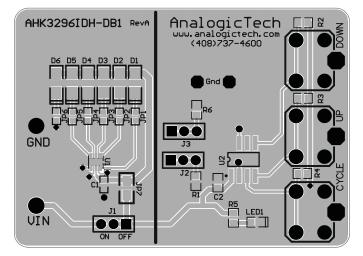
AHK3296IDH Evaluation Board Top Side Layout.
